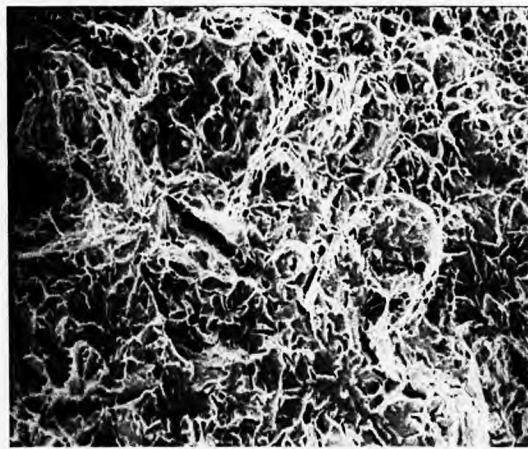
Fracture surface of flange (KCV₀ – x500)
